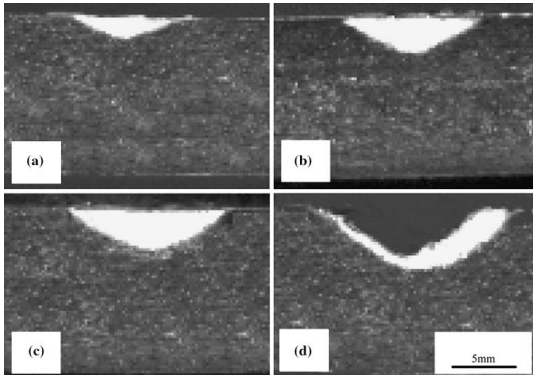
Weld pool shapes obtained in AZ31B magnesium alloys TIG welding (a) without flux, and with fluxes of (b) TiO₂, (c) Cr₂O₃ and (d) SiO₂(7).
